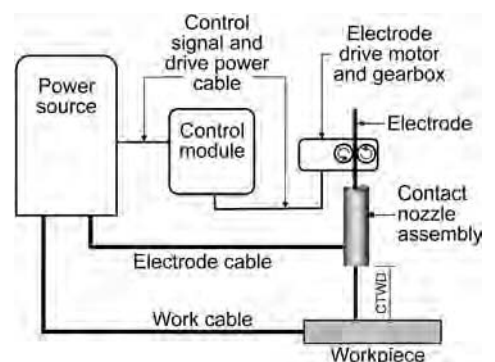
Typical submerged arc welding equipment layout. CTWD, contact-tip-to-work distance
